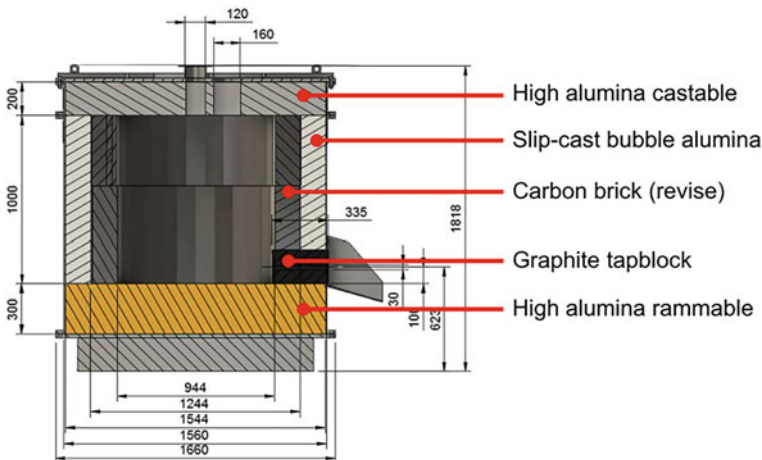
Furnace shell and refractory design for campaign 1 (dimensions in mm)
